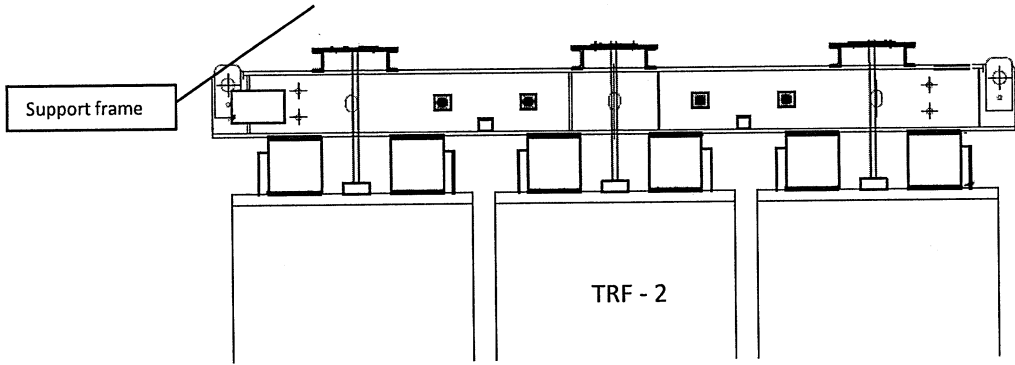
Front view showing busbar layout and mounting detail for TRF -2
